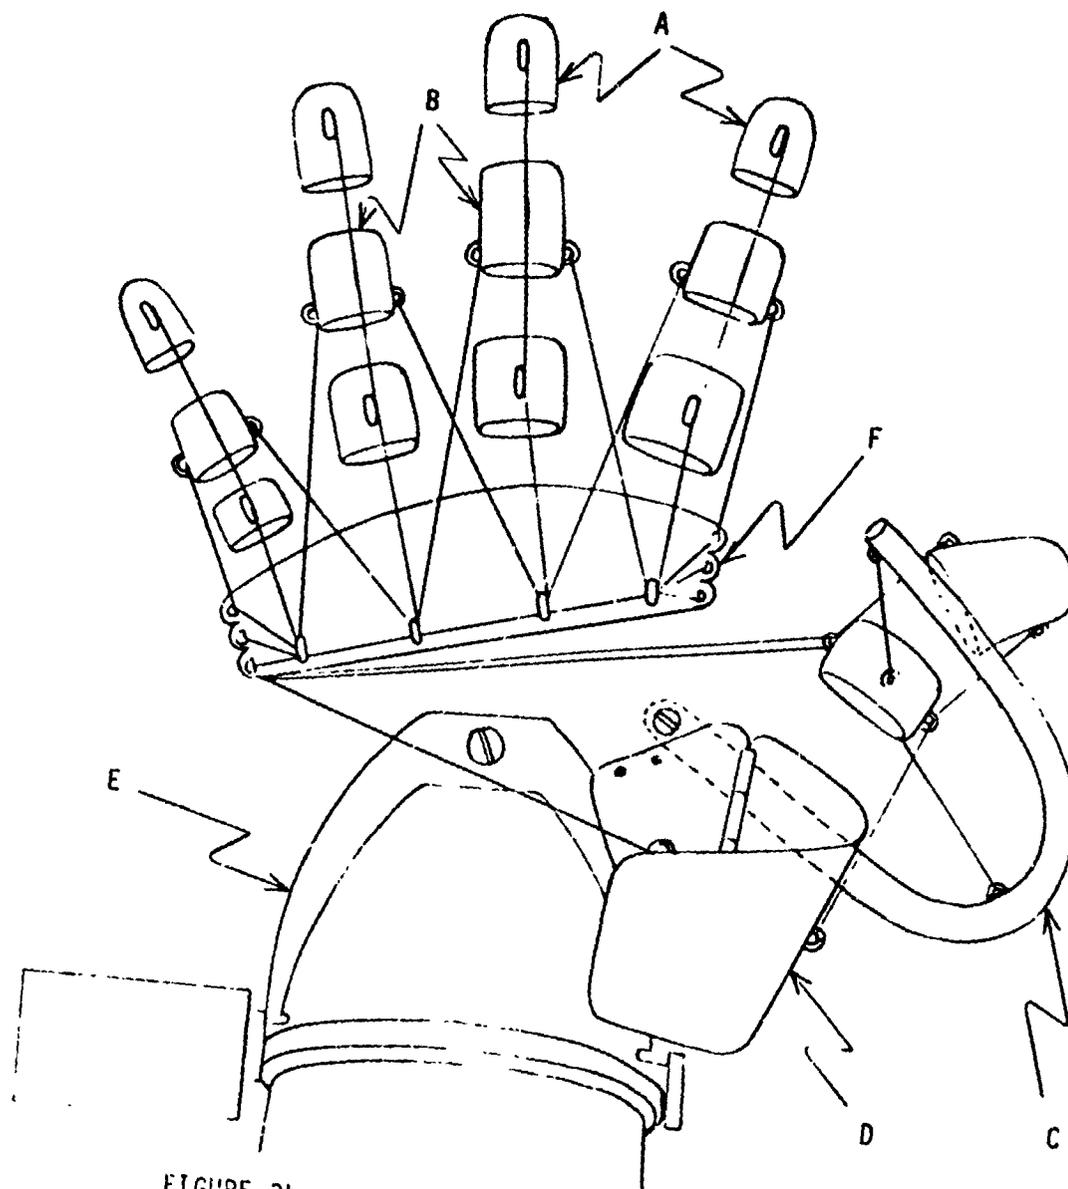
MASTER HAND CONTROLLER (BOTTOM VIEW)
